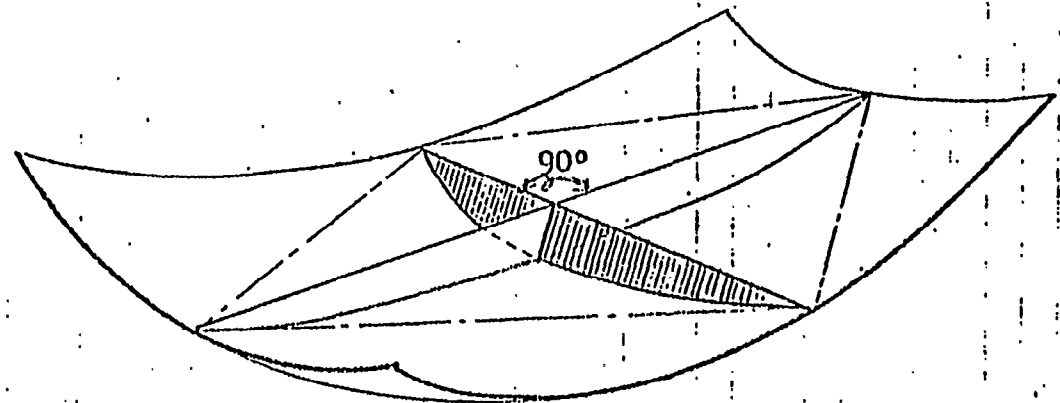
DATUM PLANE FOR BLOCK ASSEMBLY (1/2)
